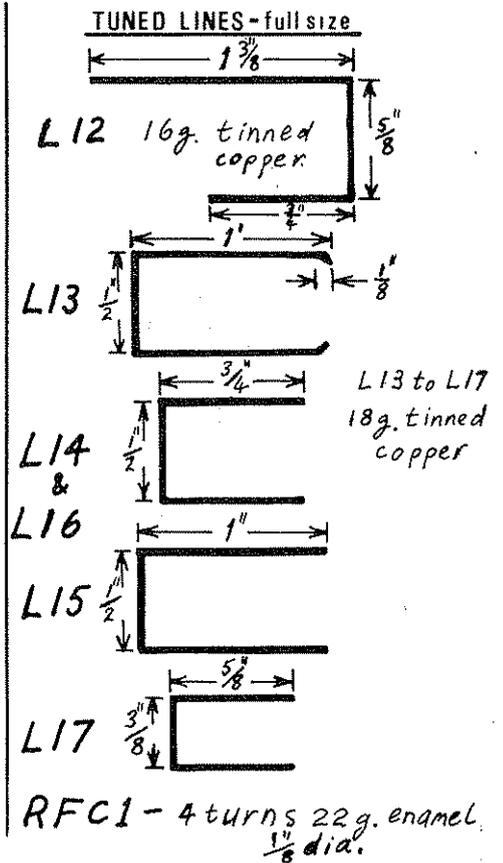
FULL SIZE LAYOUT - mixer-amplifier.
